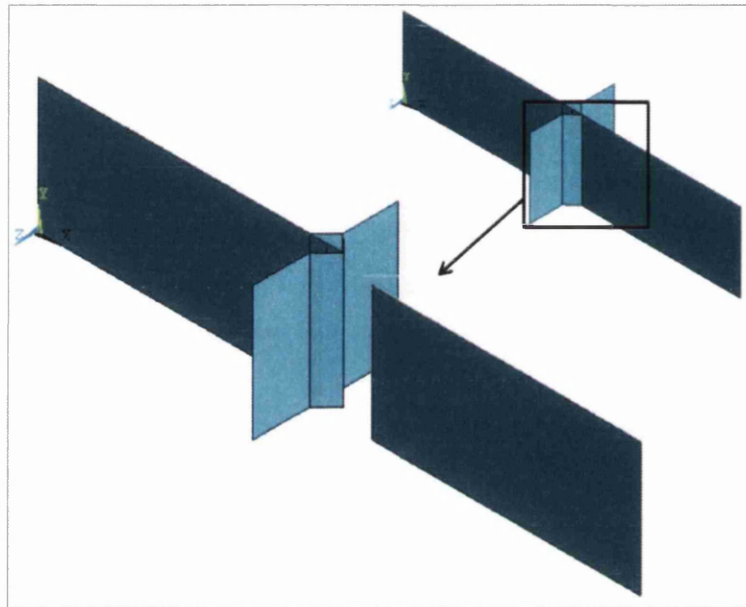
Double non-load-bearing transverse attachment - FE shell model crack plane (NLT1D)
